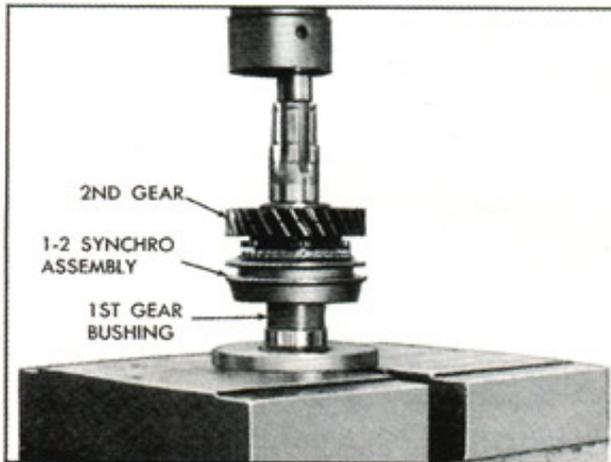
Installing 2nd Gear, 1-2 Synchro and 1st Gear Sleeve
